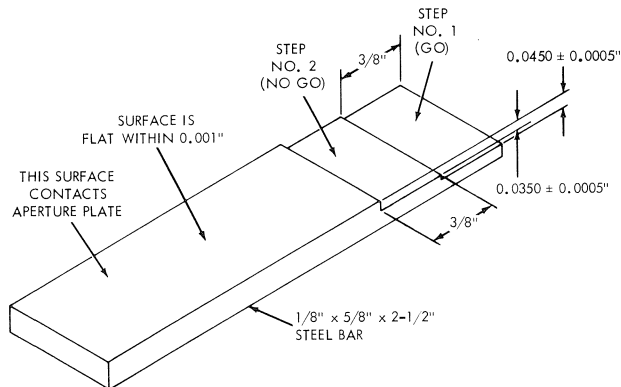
CLAW ARM PROTRUSION GAGE G14-38000
